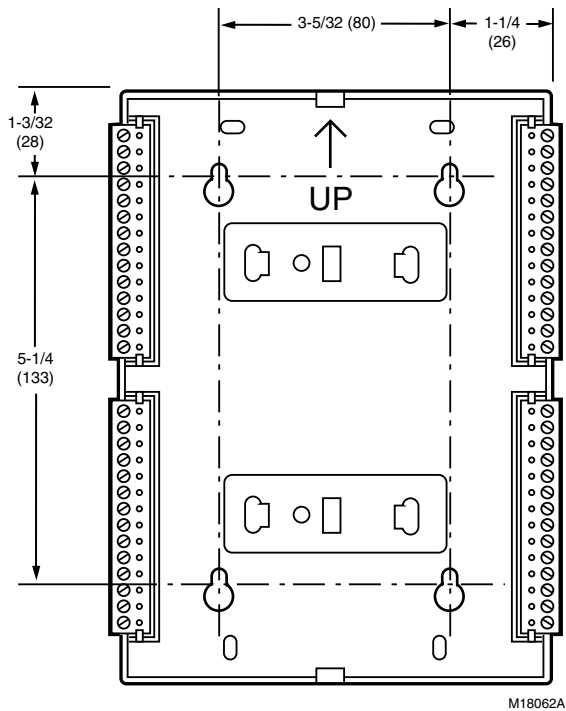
W7760C subbase mounting dimensions in in. (mm).
